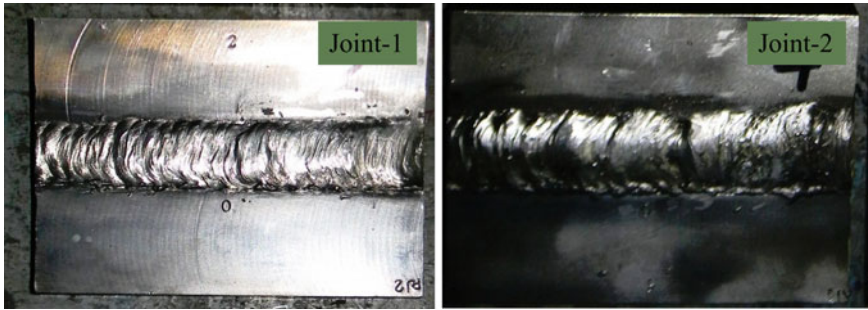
As-welded joints fabricated by SMAW and GMAW process
